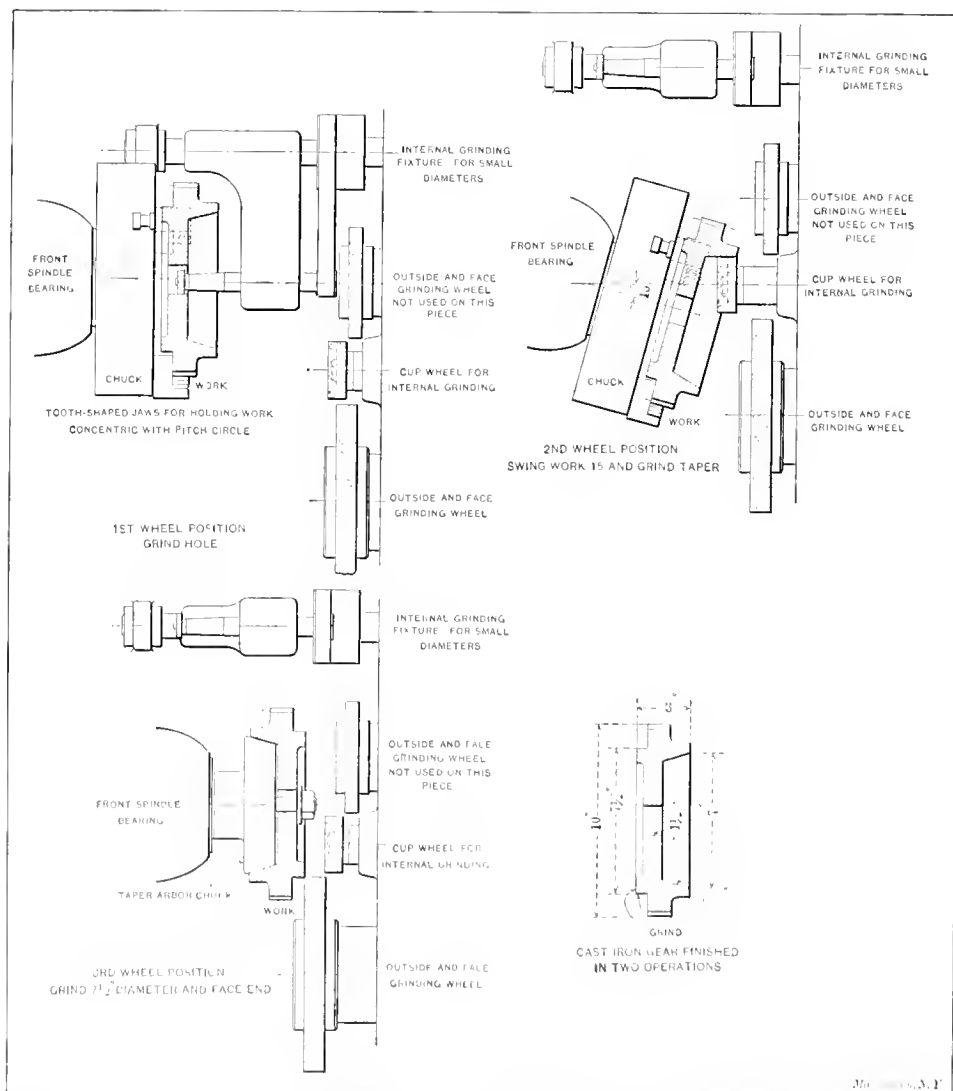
Diagram showing the Method of Finishing a Hardened Gear with Conical Clutch Surface
